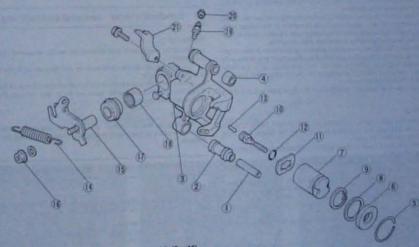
Exploded view of the rear brake caliper assembly (Sec 15)
